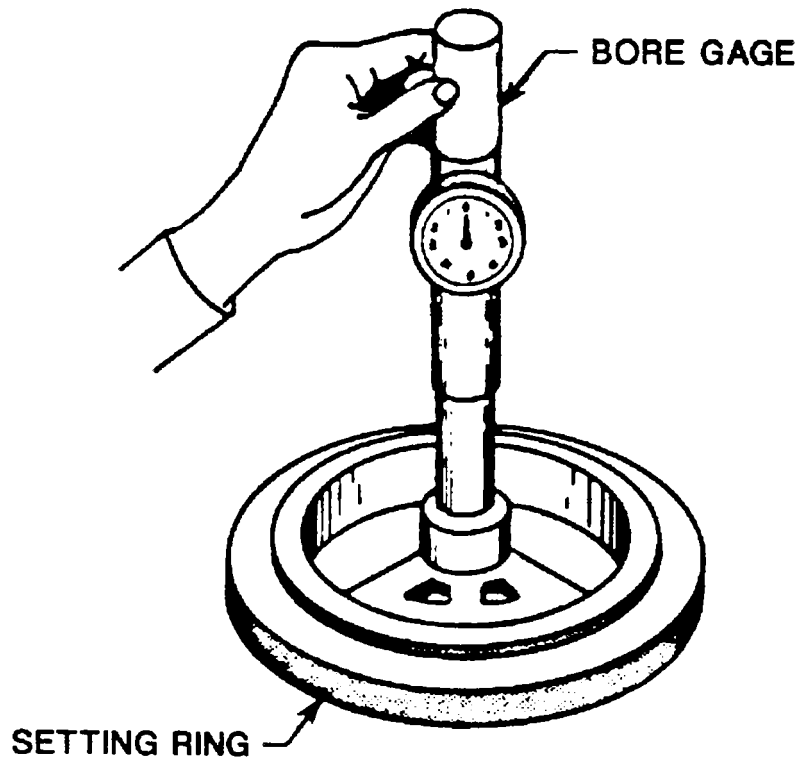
Setting Dial-Indicating Bore Gage to Setting Ring
